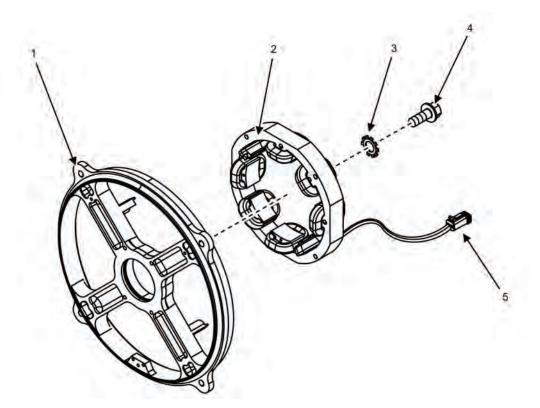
400 Hz Exciter Stator Winding — Removal.
